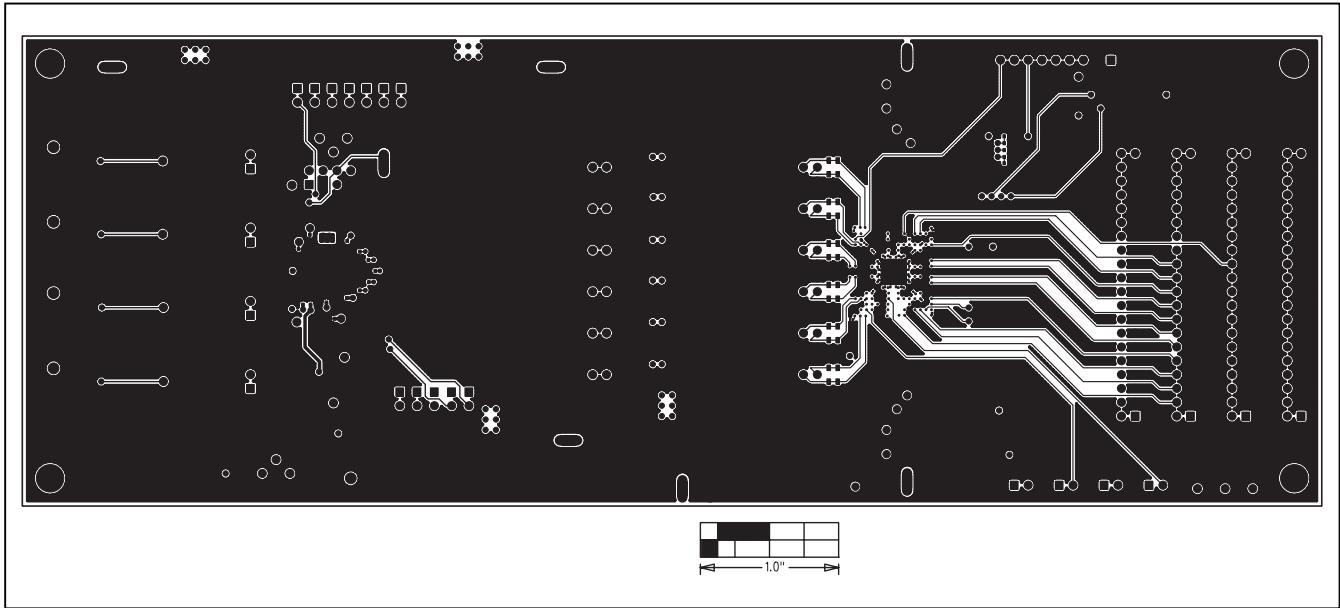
MAX1127 EV Kit PC Board Layout—Solder Side
